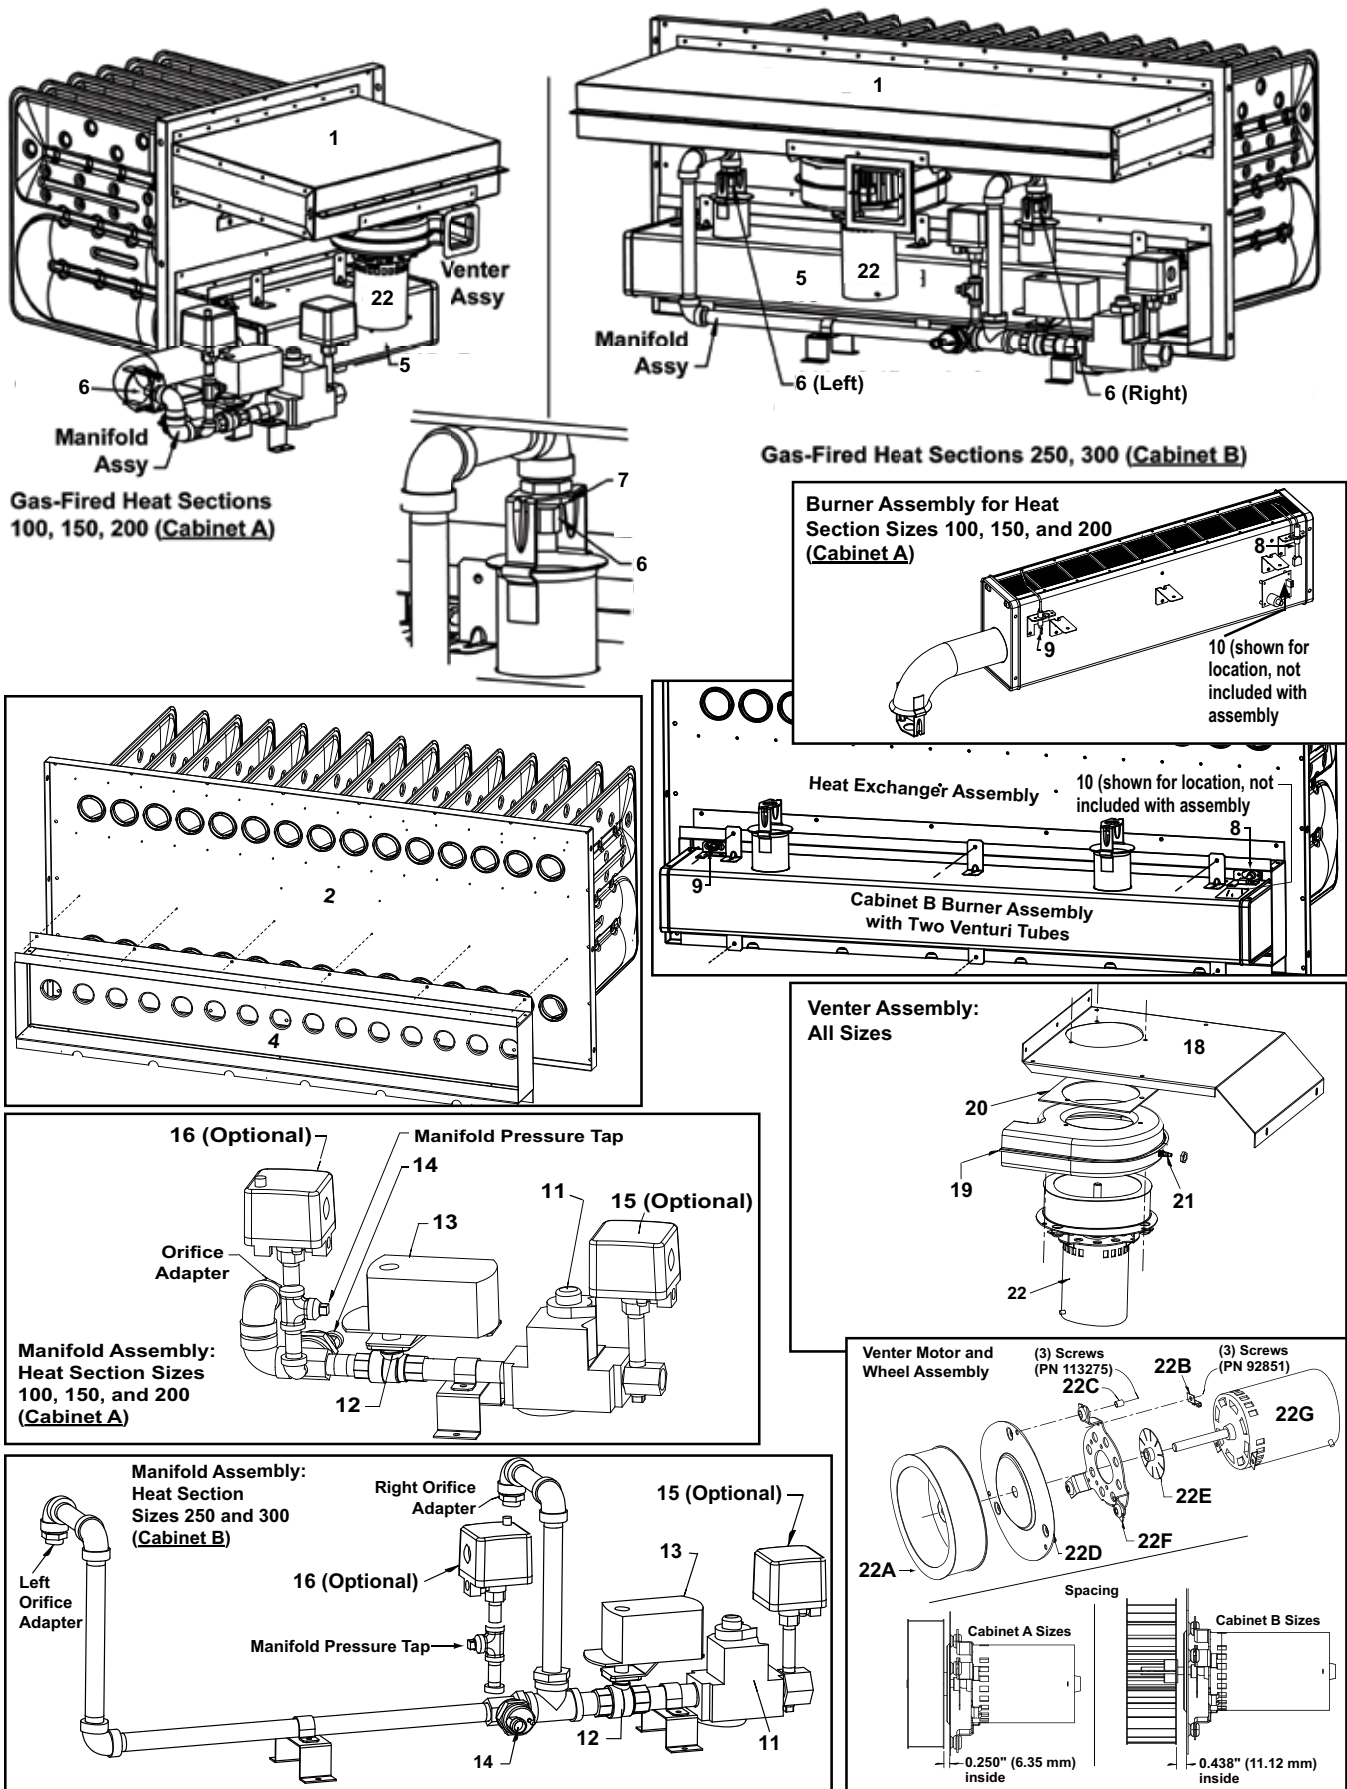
Cabinets A and B Gas Heat Components (Refer to Table 41)
